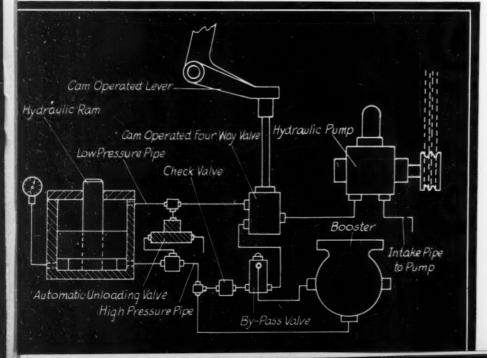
Left—Schematic drawing of hydraulic system showing control of ram by camoperated four-way valve and booster
